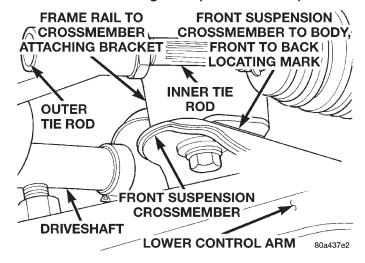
Front Suspension Crossmember Front To Back Locating Mark (Left Side Rear)
